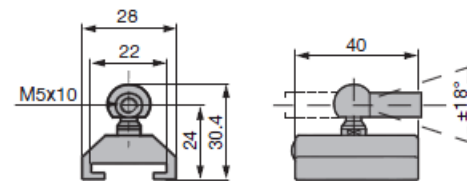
Installation dimensions of BTL5-F-2814-1S magnet
